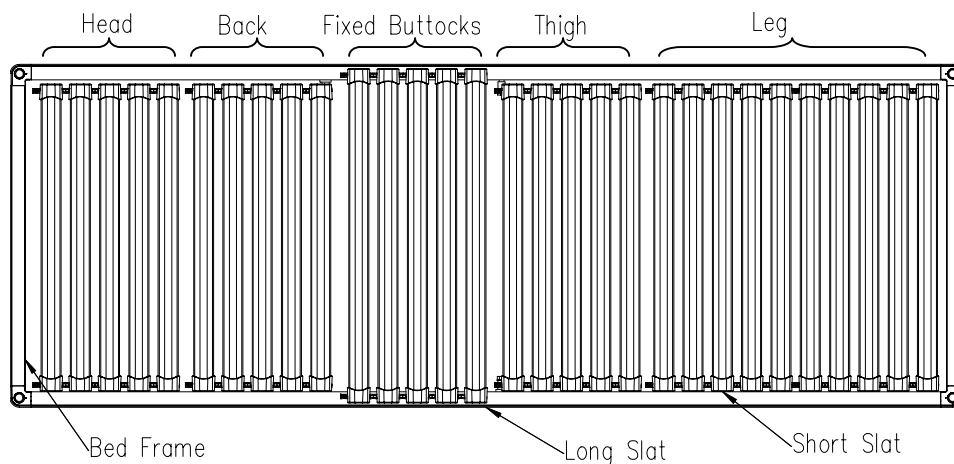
Top view of frame showing the buttocks section mounted in the bed frame and the two sizes of slats
